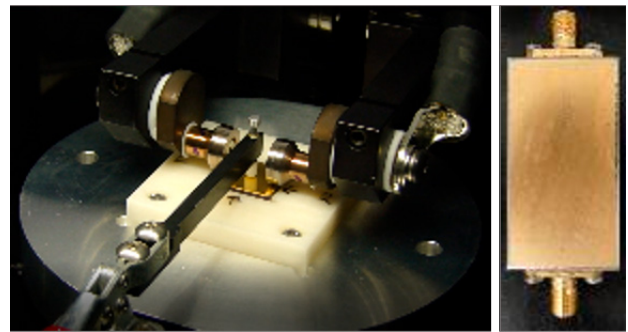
Hermetic sealing using special electrodes that weld the lid onto the package to create a continuous seam. This type of sealing is typically performed on high-reliability microelectronics packages that need to survive in harsh conditions.
